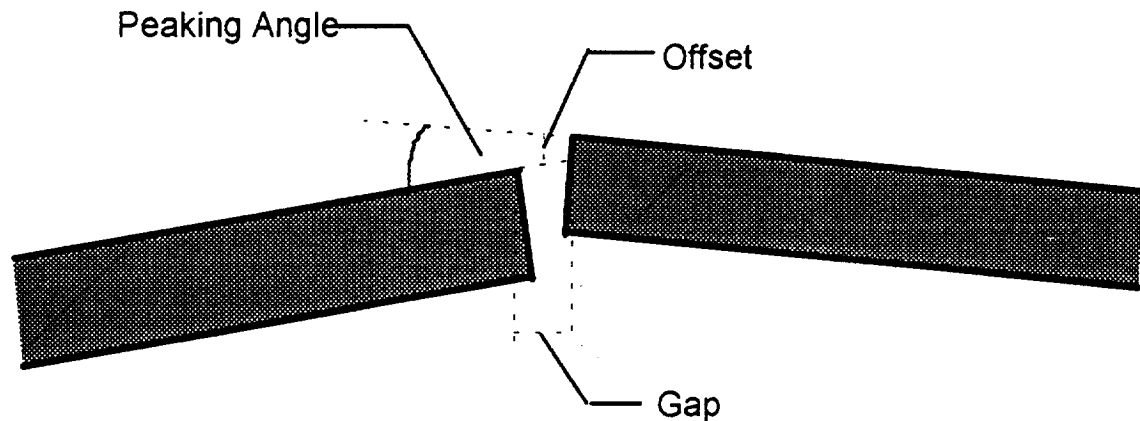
Pre-Weld Part Fit-Up Measurements
